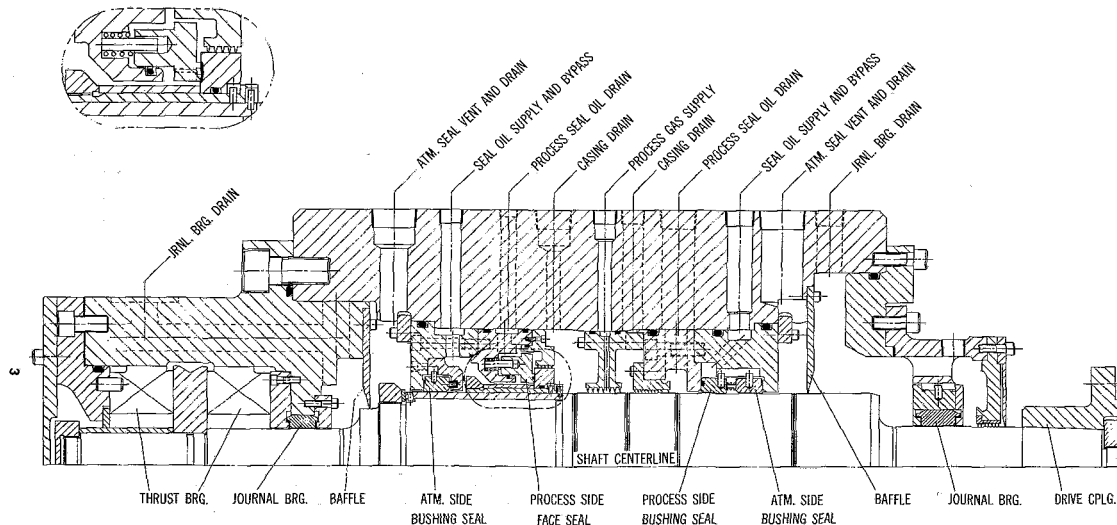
Seal test rig cross section showing conventional cylindrical smooth-bore bushing seal assembly and radial outward-flow face seal assembly
